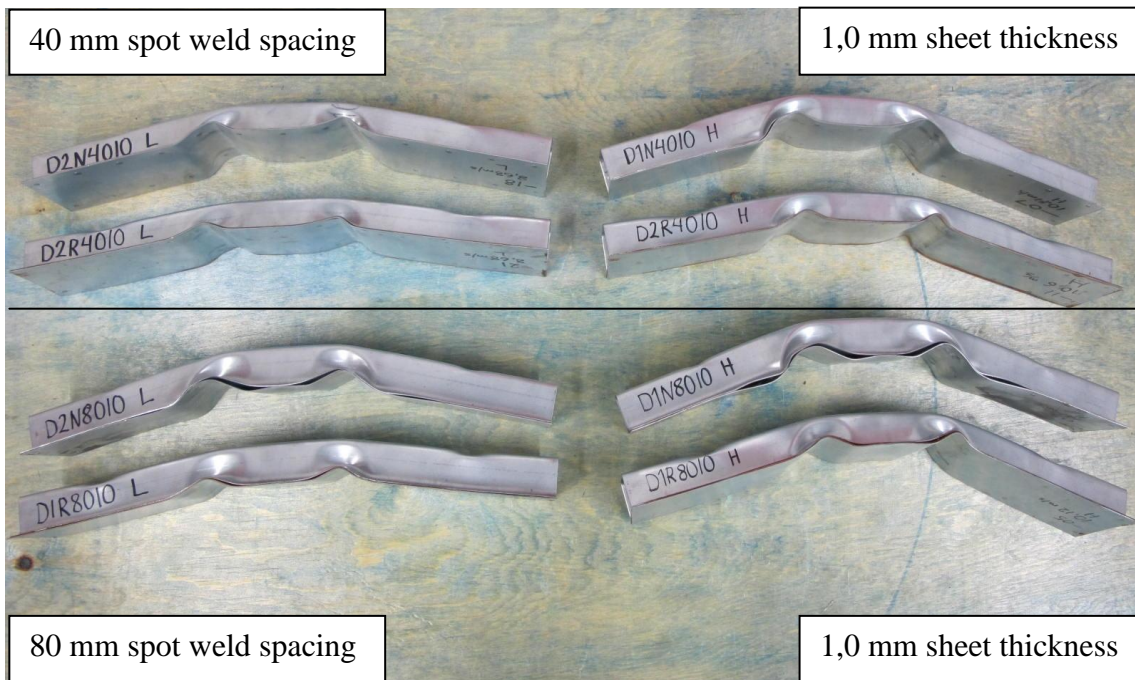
All the beams in the picture are in sheet thickness 1,0 mm. The upper part is showing 40 mm spot weld spacing and the lower part is showing 80 mm spacing. The beams are positioned in pair. From top: RSW and rubber weld bonded.
